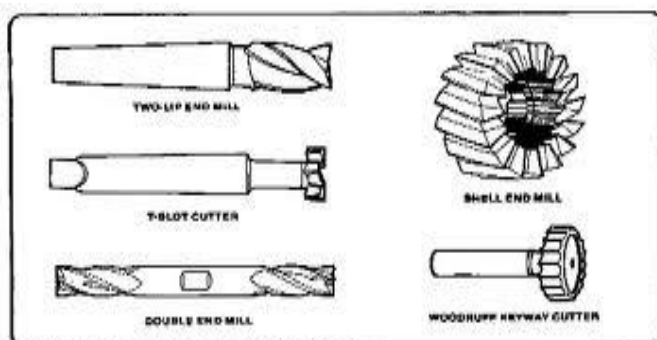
End mill, T-slot, and Woodruff keyway cutters.
